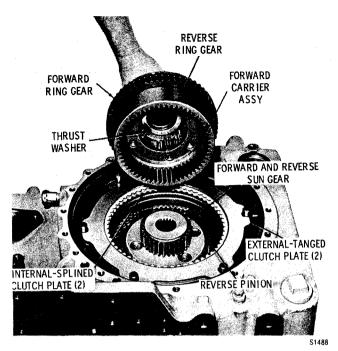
Installing forward planetary carrier assembly and attached parts (TRT-3 overdrive)
